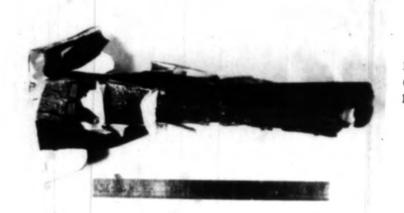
23X OUTBOARD SEGMENT VIEW SHOWS THE HEEL OF THE SPAR.
